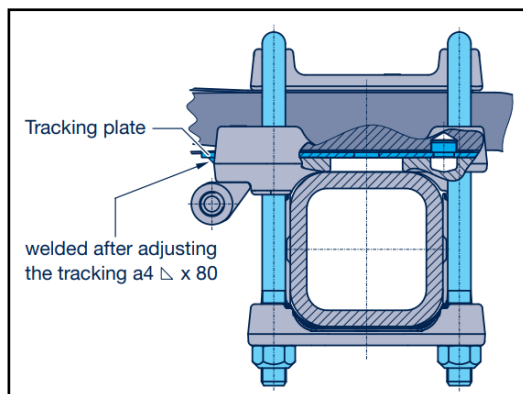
Illustration of the position of the tracking plate on the axle assembly
